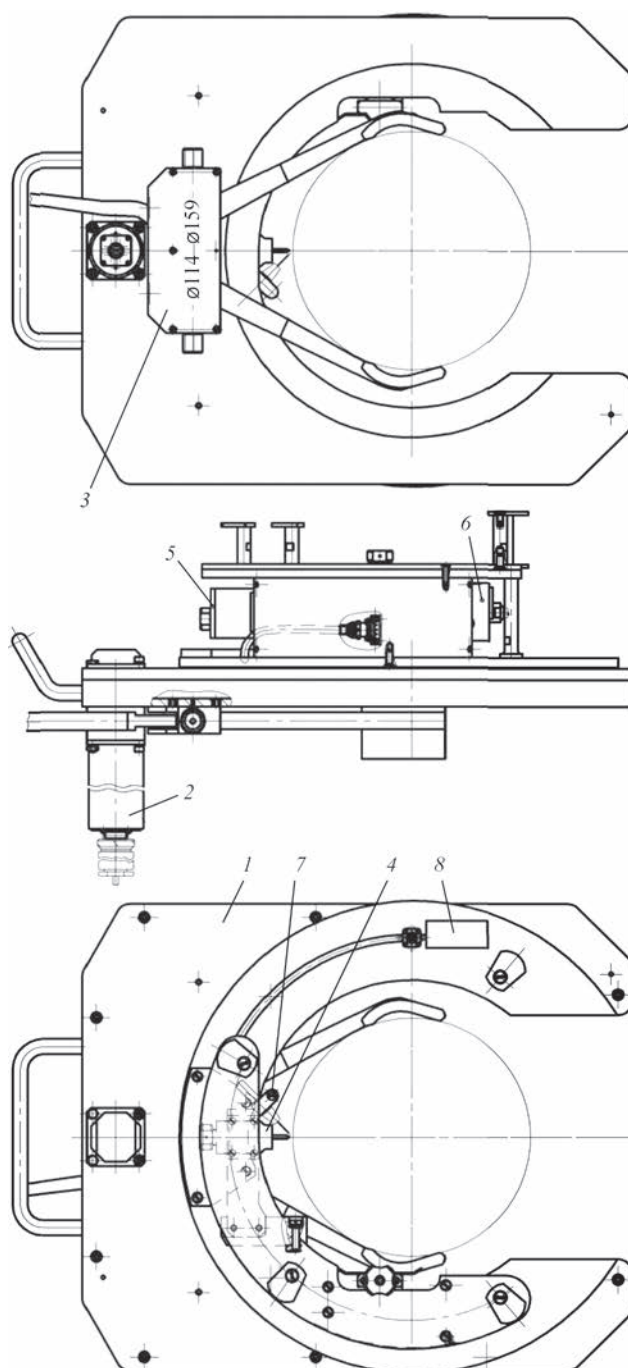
Typical general view of welding heads ADTs 628.03.00.000, ADTs 629.03.00.000 and ADTs 630.03.00.000: 1 — casing; 2 — rotation mechanism (rotator); 3 — mechanism for clamping (fixing) welding head on a pipe being welded; 4 — torch; 5 — AAVR mechanism; 6 — mechanism of transverse movement of nonconsumable electrode (oscillator); 7 — liner; 8 — sensor of spatial (angular) position of nonconsumable electrode
